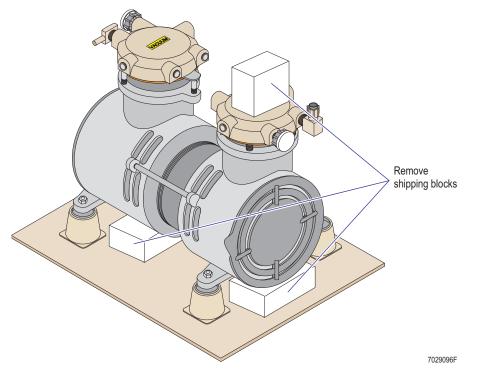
Location of Foam Shipping Blocks Used to Protect the Compressor Assembly
